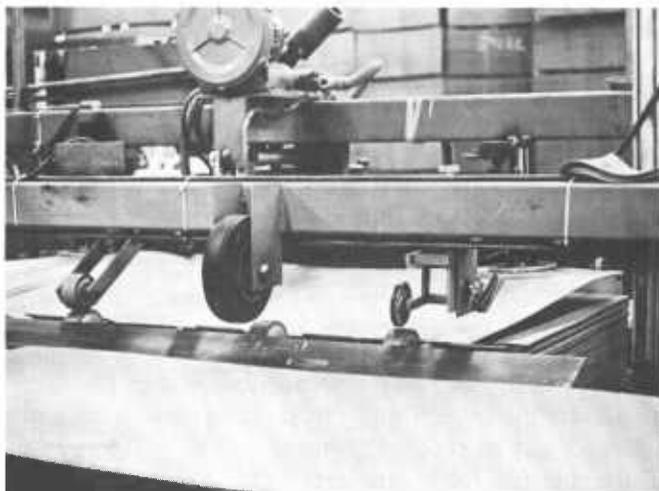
Vacuum feed. Boards are removed from stack by vacuum cups and transferred to finishing line.
